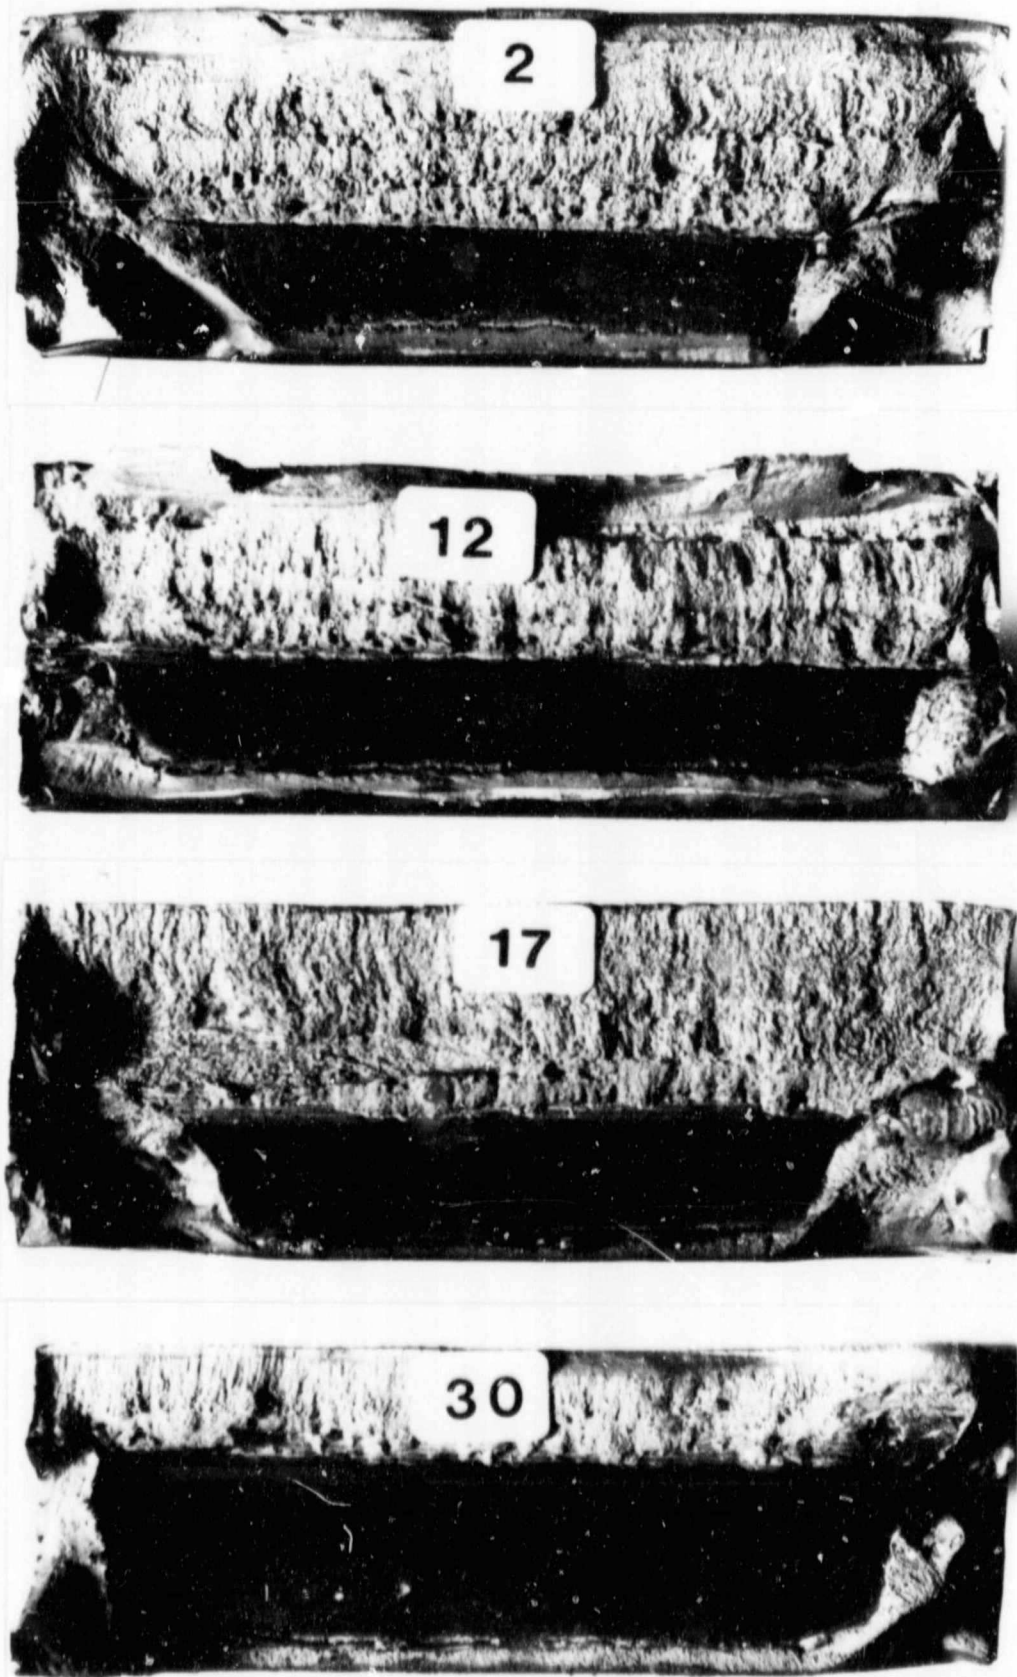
Typical fracture surfaces of the defective weldments fabricated for this study. Note the wide range in defect sizes that was achieved (magnification 1,5x).
